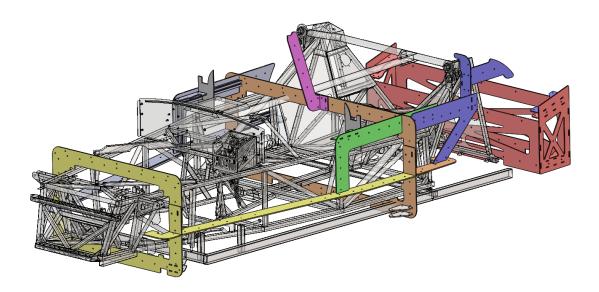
The current used jig, consisting of plates bolted togehter by extrusion profiles(not shown in figure).
